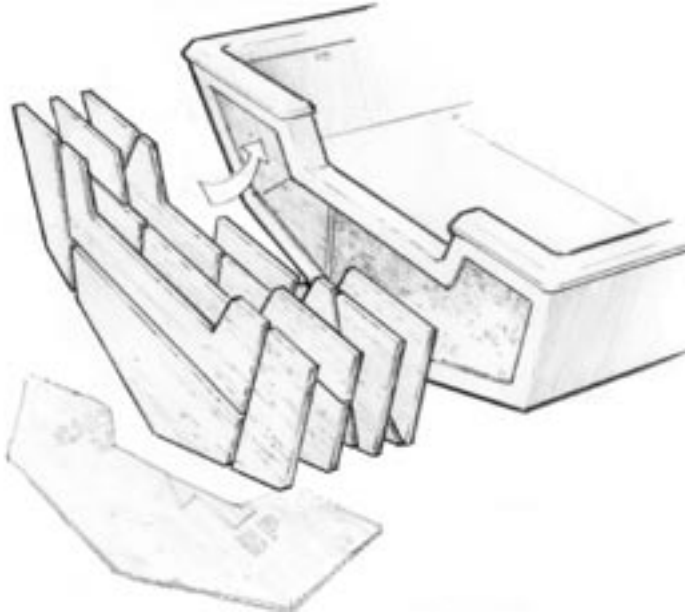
Bond a new plywood core in place. Laminate sheets of thinner plywood to equal the thickness of the old core. Trim the pieces to fit the void left by the old core using a cardboard template to layout pieces. Cut the pieces as necessary to fit opening.
